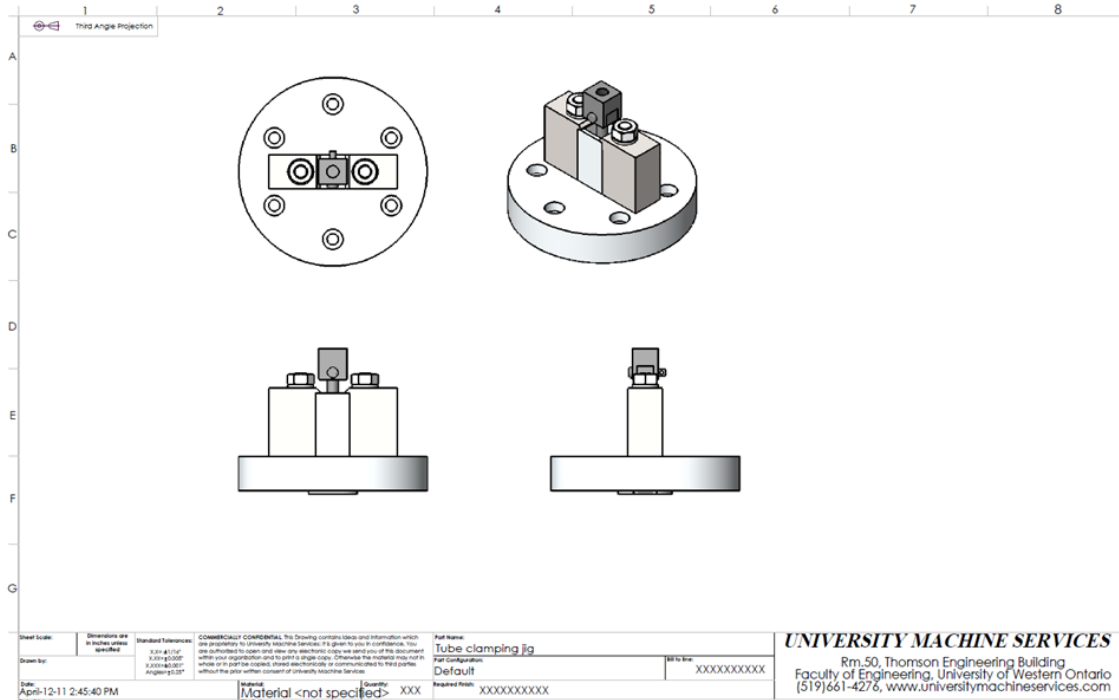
Engineering Drawing of Parts for Potting Jig Assembly
